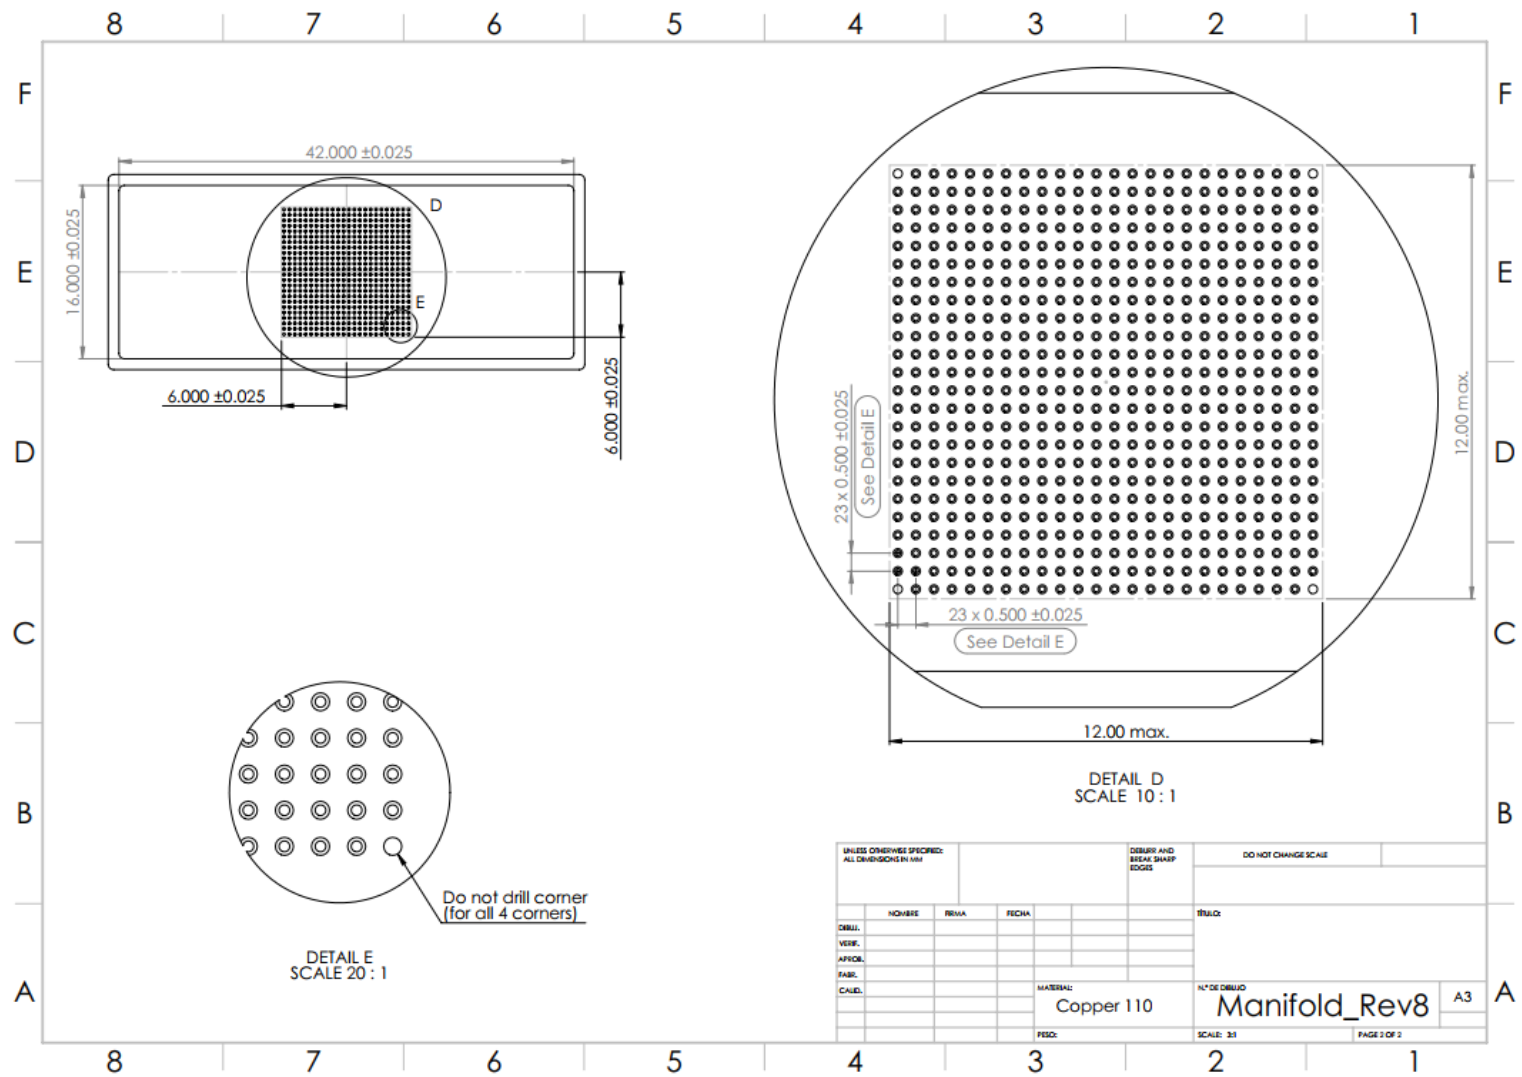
Page 2/2 for the mechanical drawing of copper manifold.
